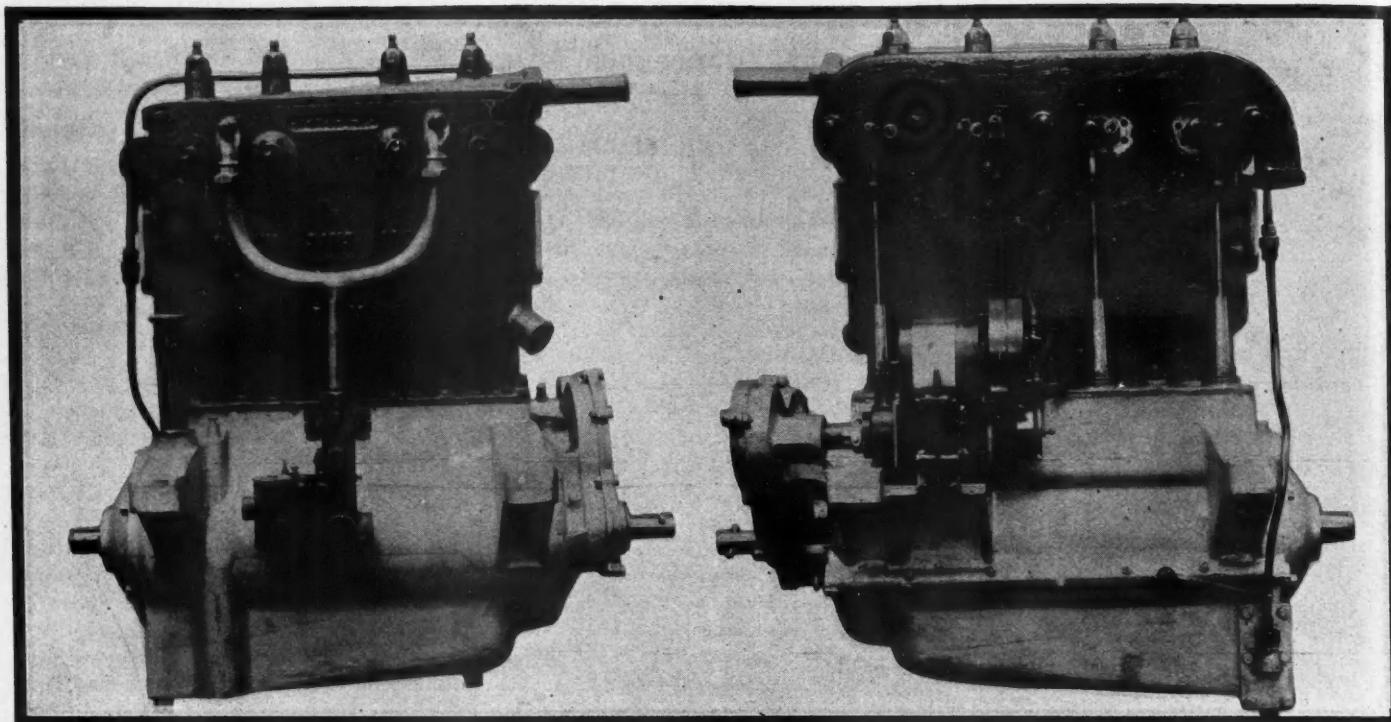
INTAKE SIDE OF DUBOIS-ROUSSEAU NON-POPPET VALVE MOTOR SHOWING SPARK PLUG LOCATION. FIG. 2—EXHAUST SIDE, SHOWING PUSHRODS TO RECIPROCATING SLEEVES
